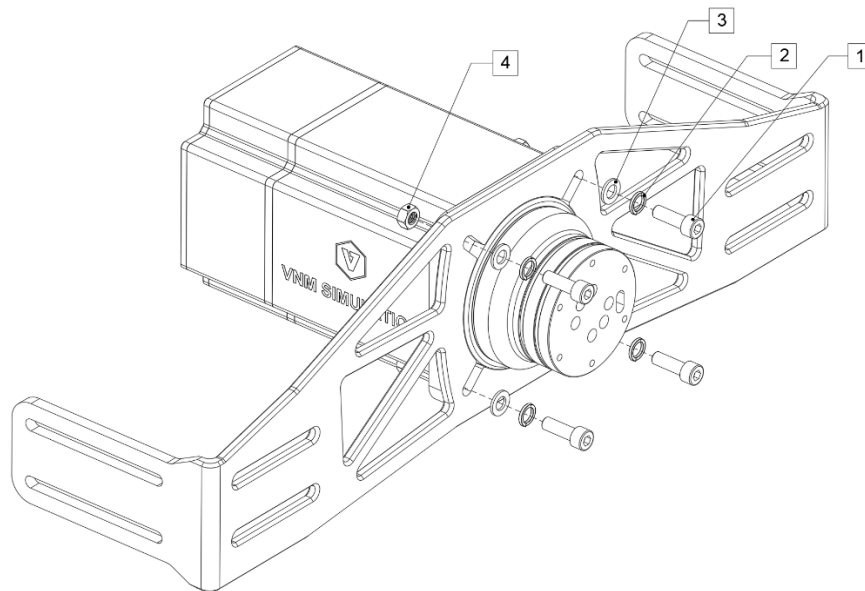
Mounting VNM Wheelbase on a simulator rig front mount bracket.
